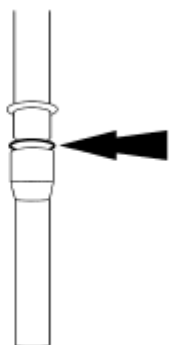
Locating O-Ring On Oil Level Indicator Tube
